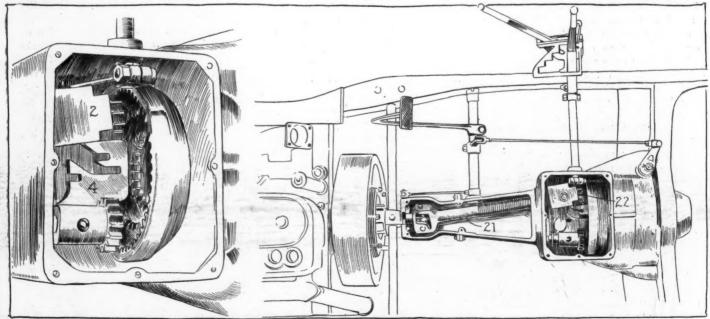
ENLARGED VIEW OF CHANGE SPEED MECHANISM, SHOWING DRIVING AND SERVICE PINIONS AND GUIDE PLATE FIG. 3—PLAN OF FORWARD PORTION OF FISCHER CHASSIS, SHOWING DRIVE SHAFT AND PINION POSITION FOR LOW GEAR
